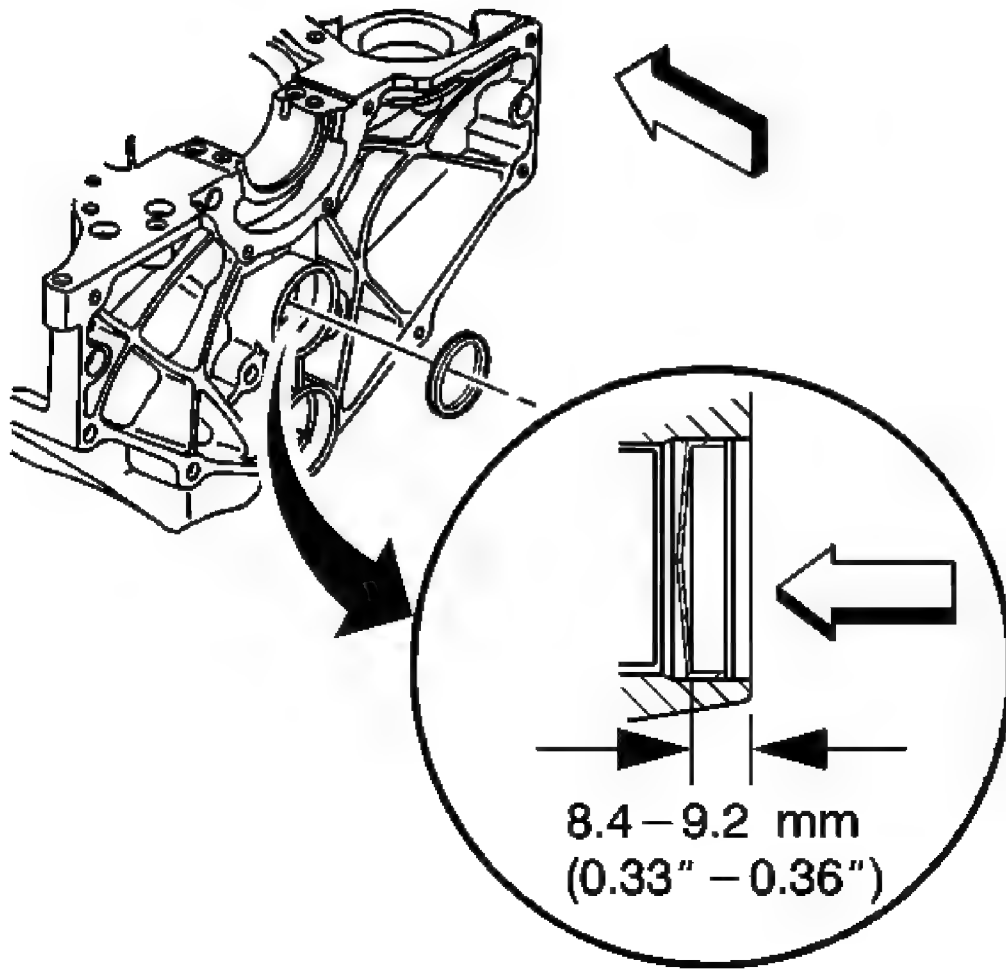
Installing Expansion Cup Plug Into Camshaft Rear Bearing Hole
